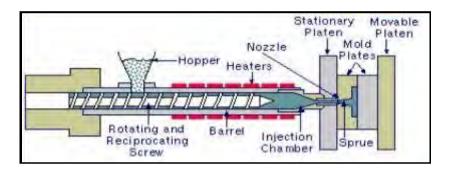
A single screw injection molding machine (Source: http://www.capetronics.com>20/11/14)
